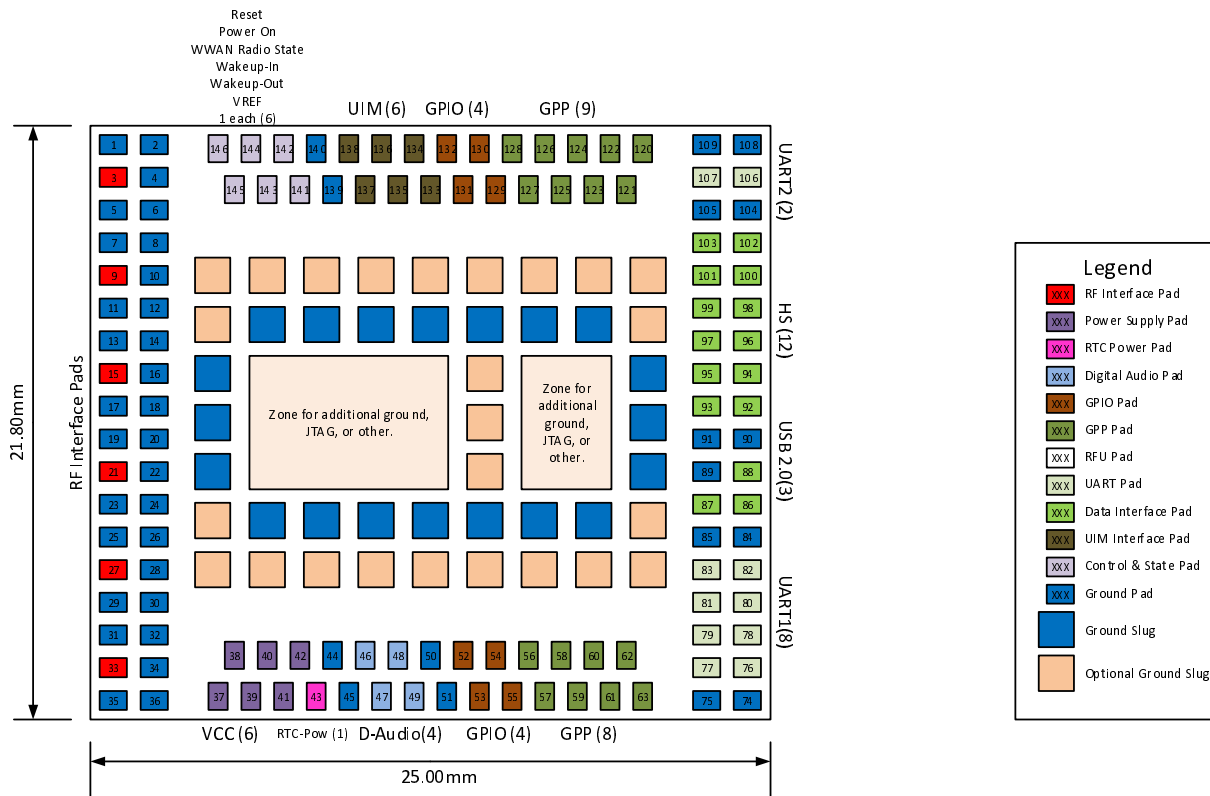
SMT2522 physical form factor (545 mm<sup>2</sup>), dimensions, pad numbering and placement
